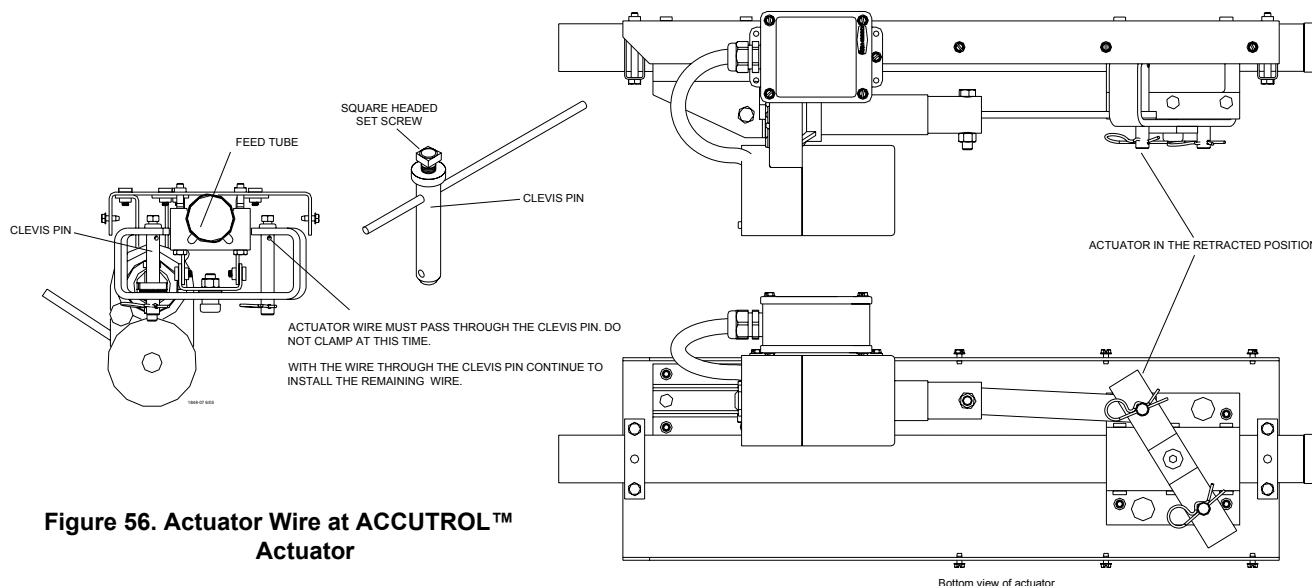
Actuator Wire at ACCUTROL™ Actuator
